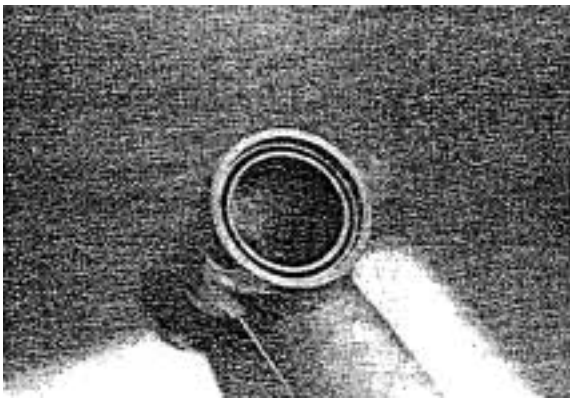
A bearing properly installed into the headtube. (Note that the side of the bearing with the grooved races is facing inward).
